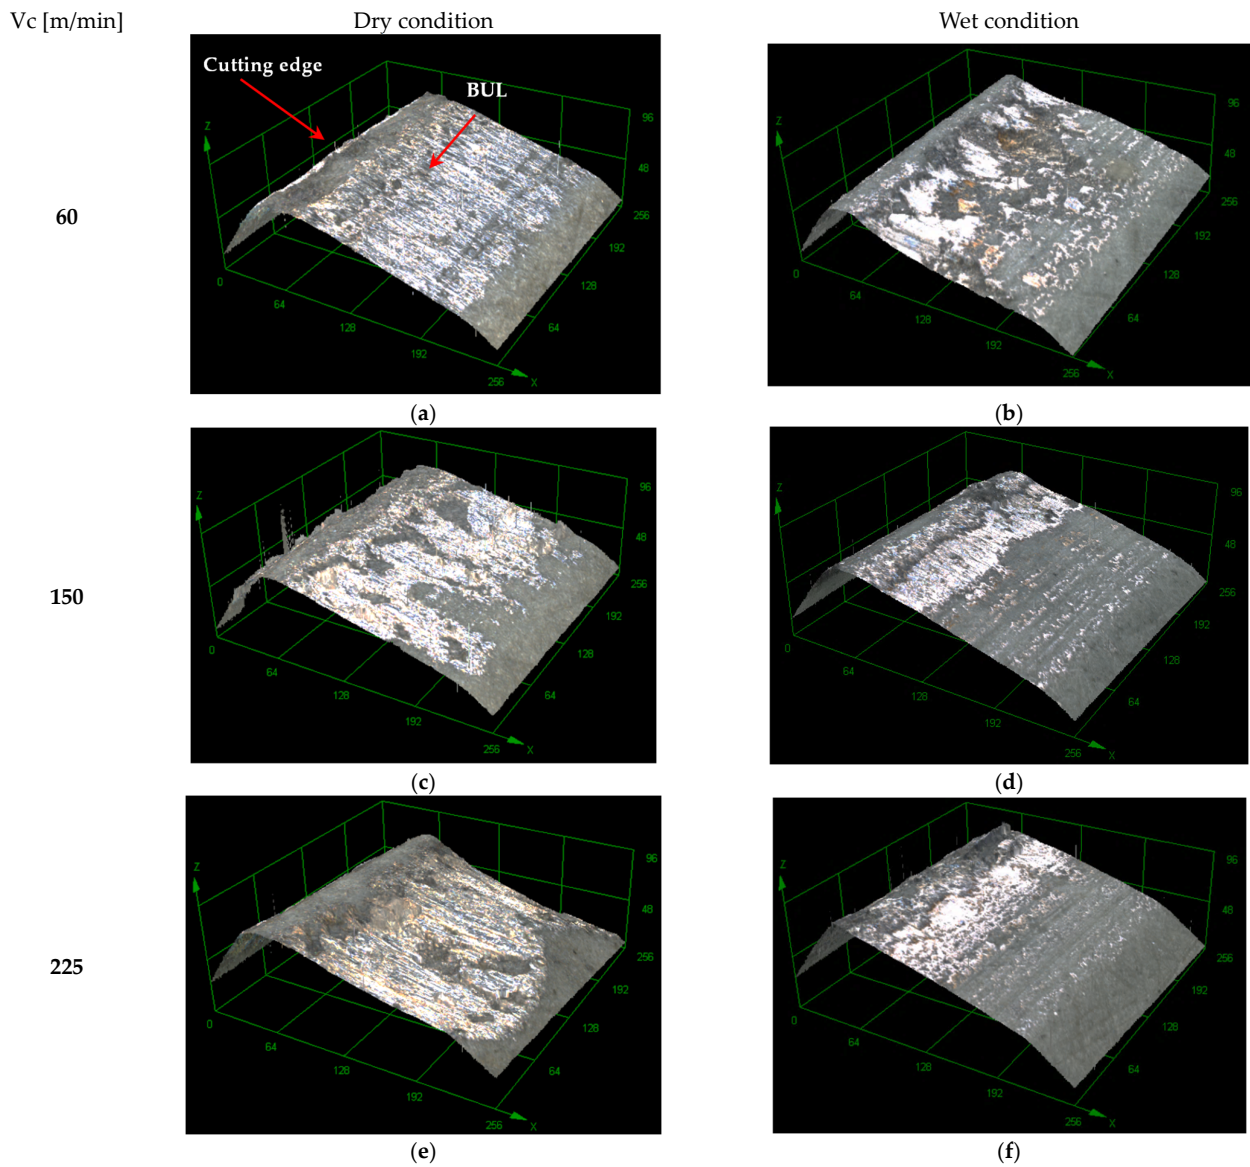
Three-dimensional confocal laser image of the chamfer land of cutting inserts. (a,c,e) dry machining, (b,d,f) wet machining.
